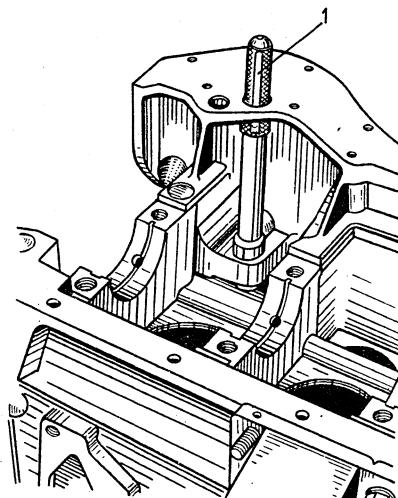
Driving Out the Oil Pump and Ignition Distributor Drive Gear Bush:
